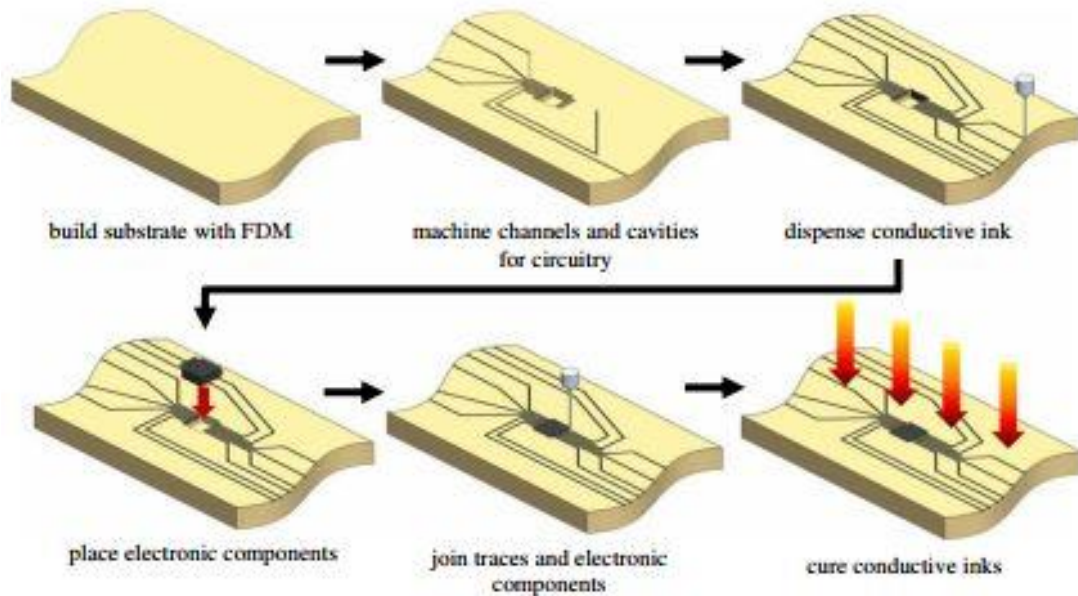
Steps followed for fabricating the 3D-printed CubeSat module utilizing FDM and conductive inks [37].
